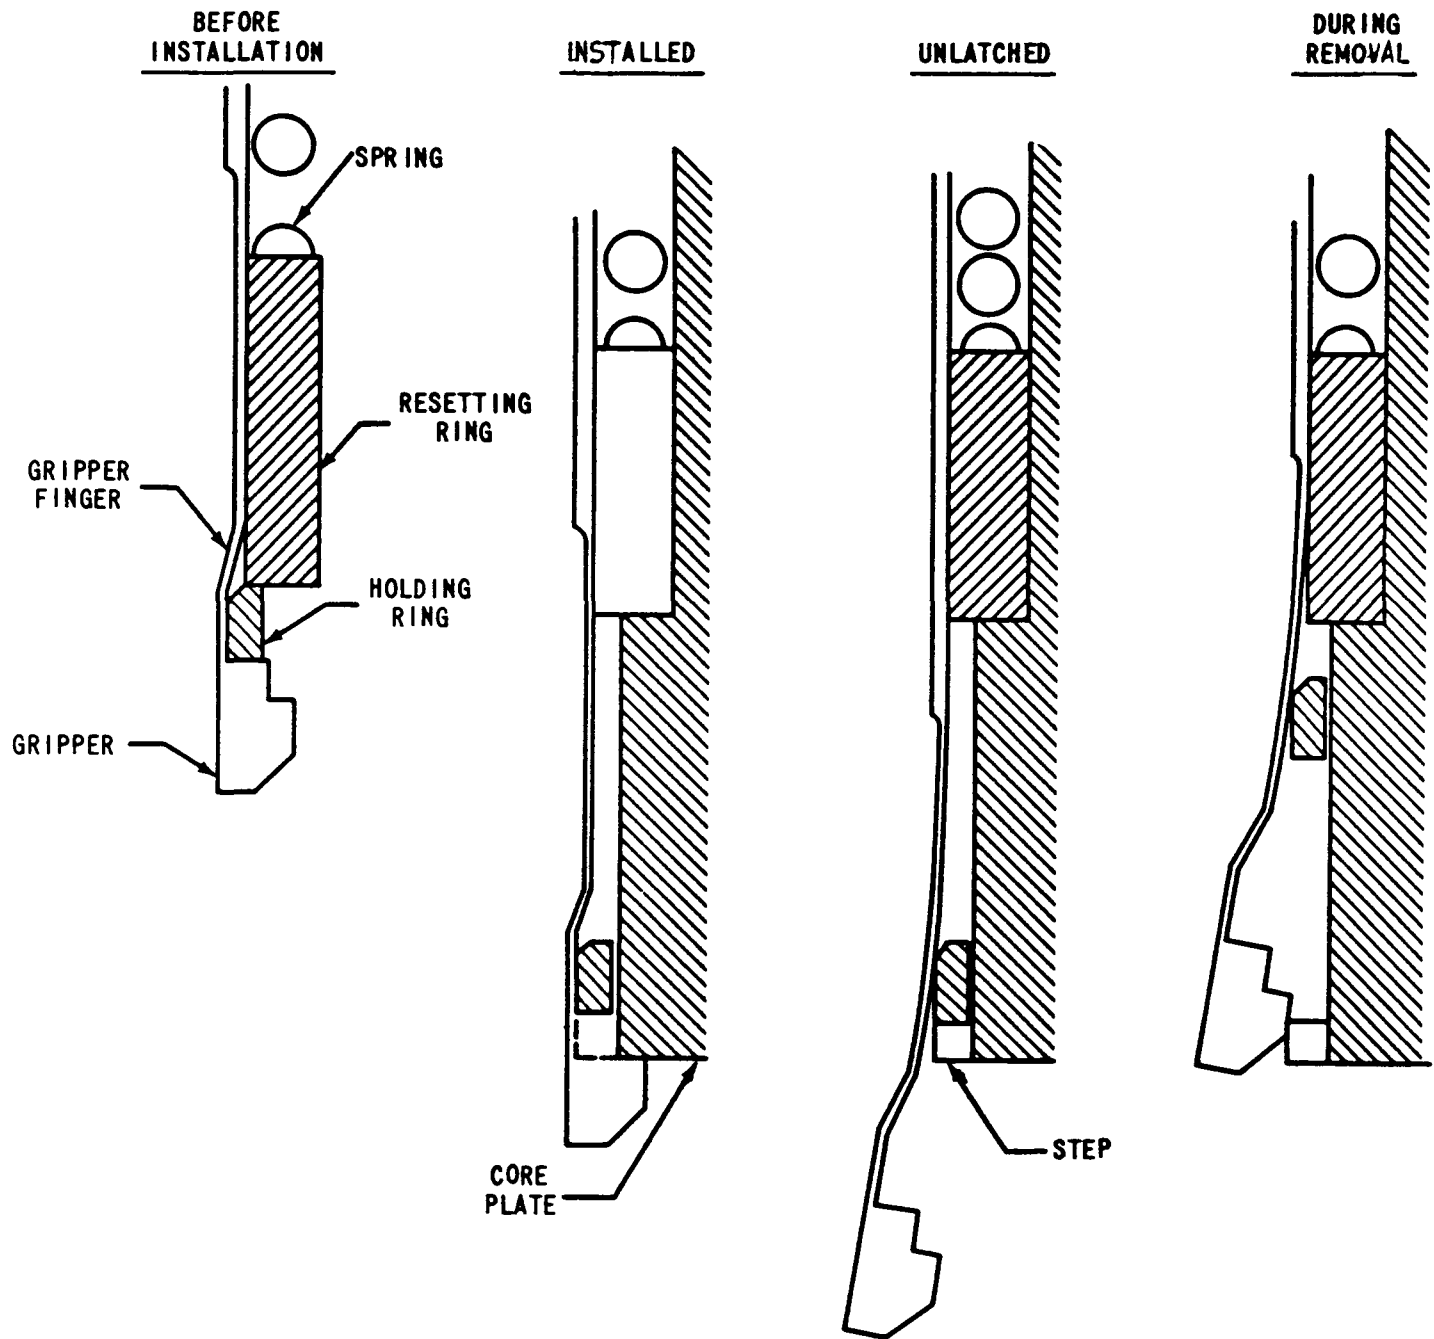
FUEL ASSEMBLY INSTALLATION & REMOVAL
